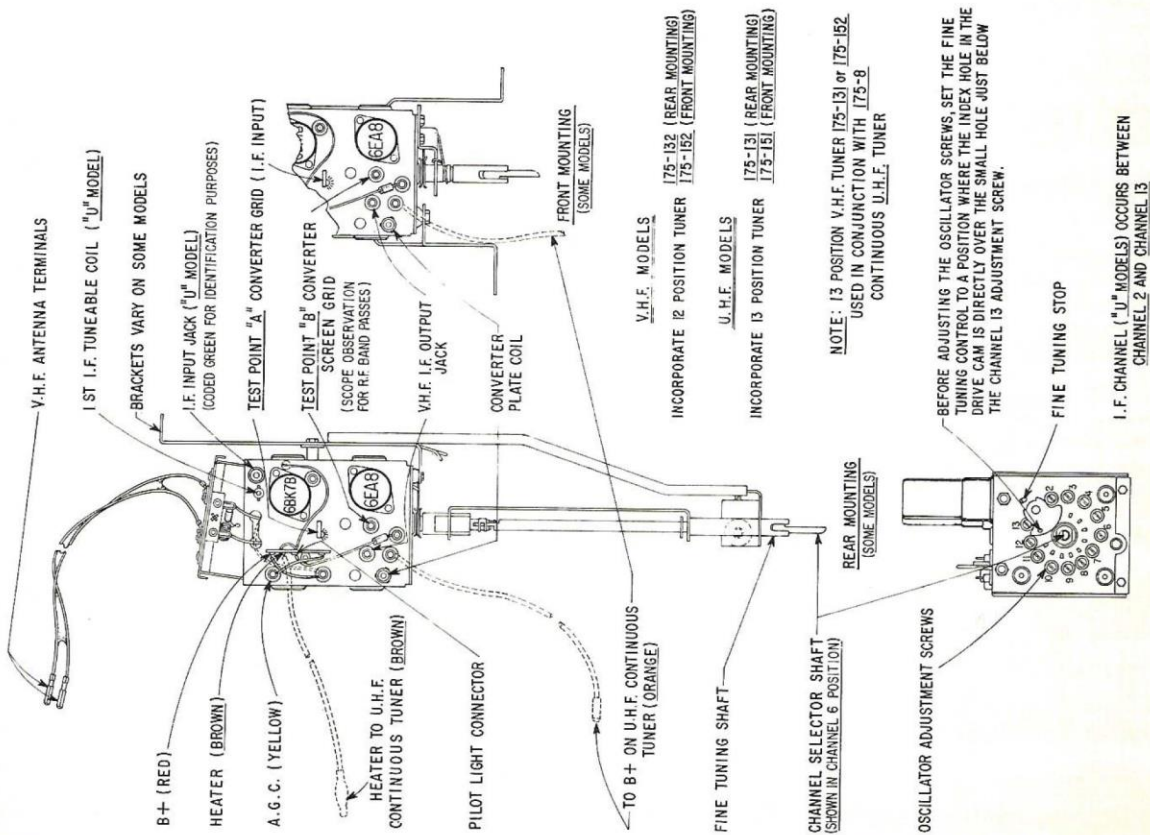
Tube and Trimmer Layout, Bandswitch Tuner
